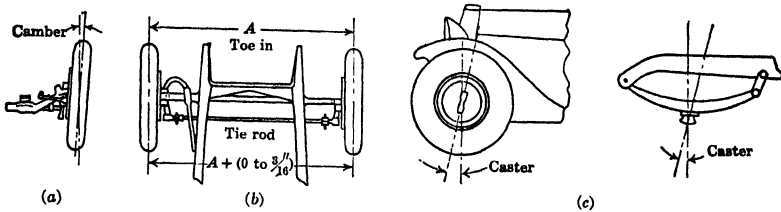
Diagrams illustrating: (a) Camber. (b) Toe-in. (c) Caster.
